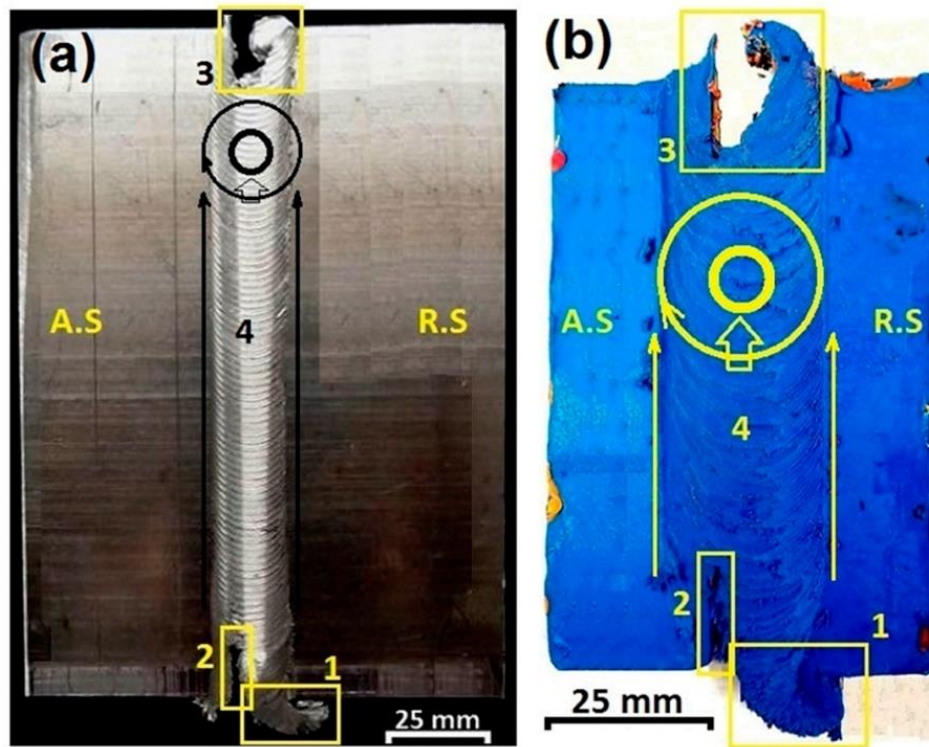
Top surface of the weld samples; defect features and the direction of the tool relative to the weld-line: (a) Aluminium plate; and (b) plasticine model; (1) the entry spray, (2) tunnel void discontinuity, (3) the exit zone, (4) weld-line track.
